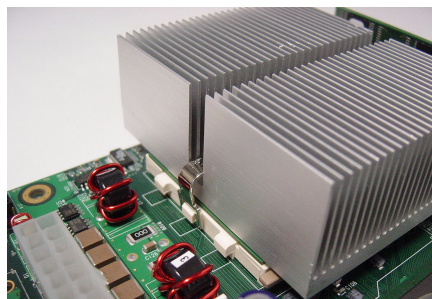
Connecting the Heatsink Clip at the Front of the Processor Socket
